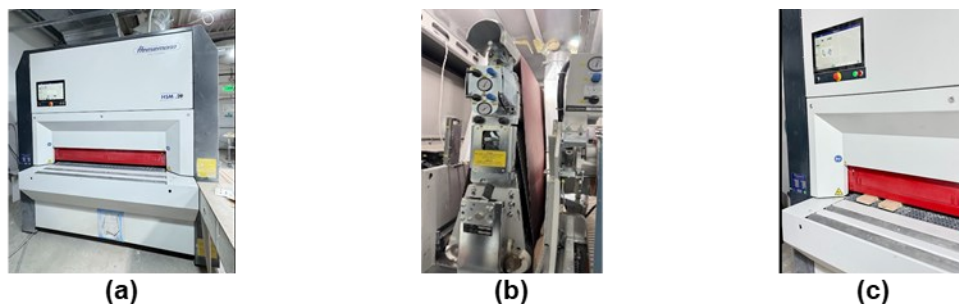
Processing by sanding: (a) Heesemann 2023.07.271 sanding machine, (b) ZK713X zirconia alumina abrasive belt, (c) sample processing.
